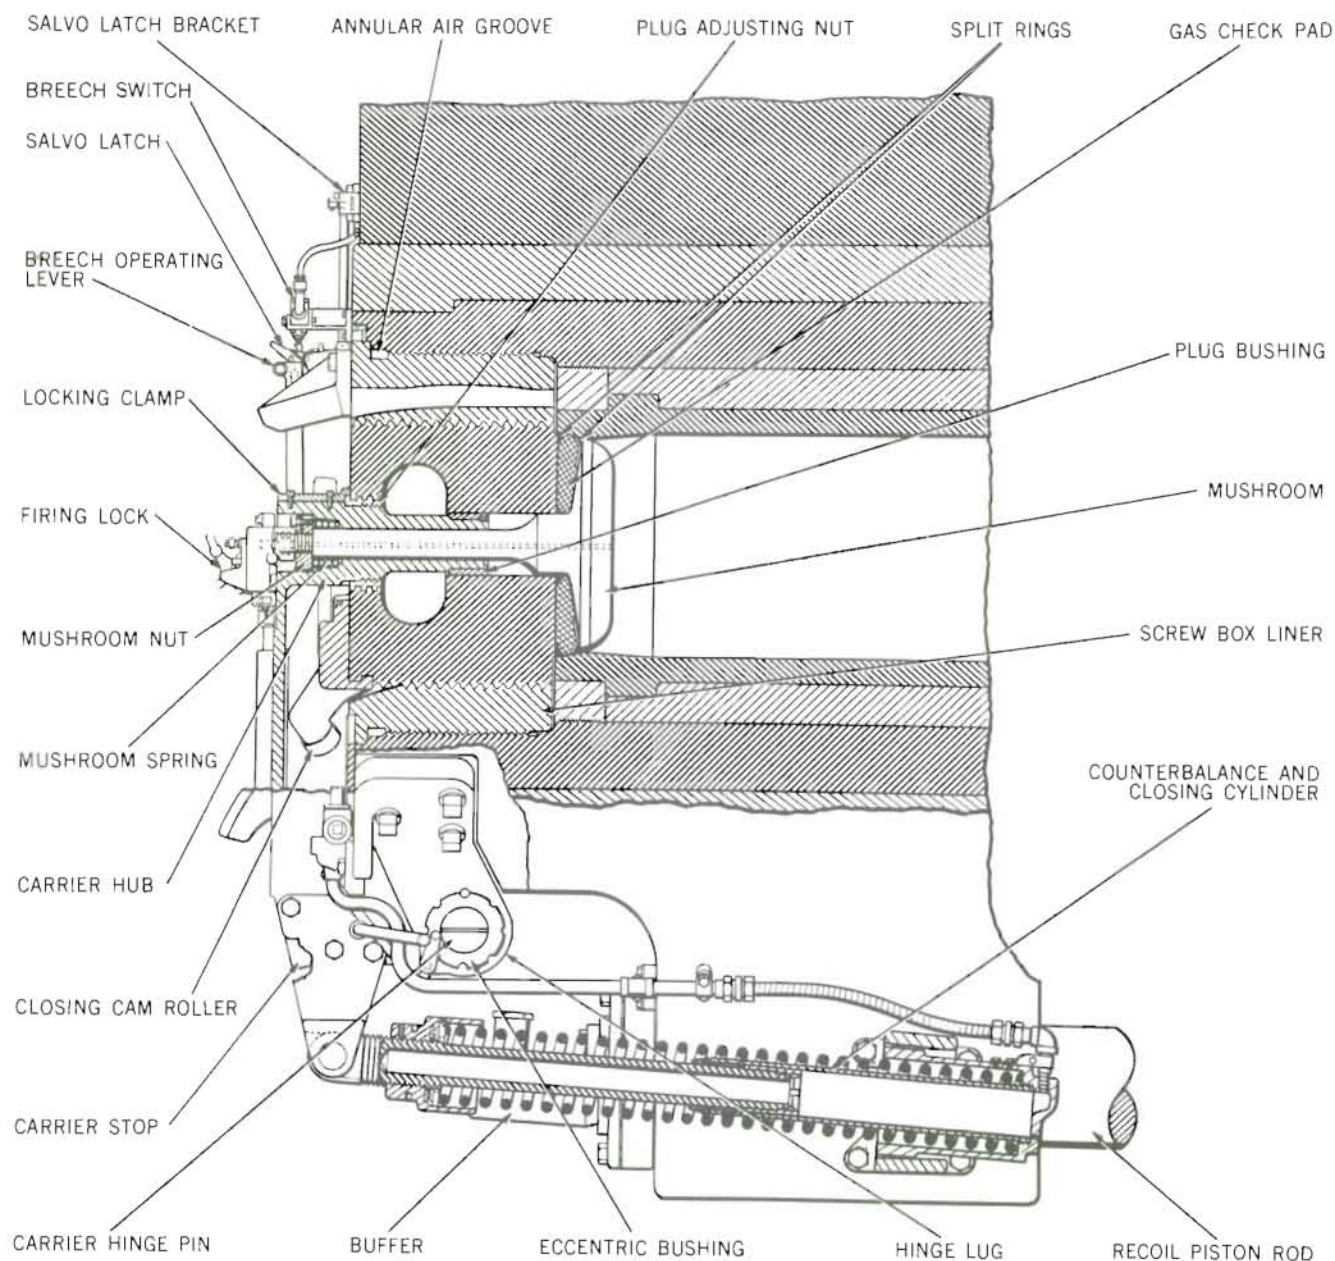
16-inch Breech Mechanism Mk 4 Mod 0 - Sectional View
